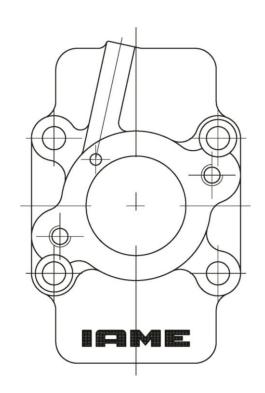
PHOTO IDENTIFICATION CARBURETTOR INLET CONVEYOR
